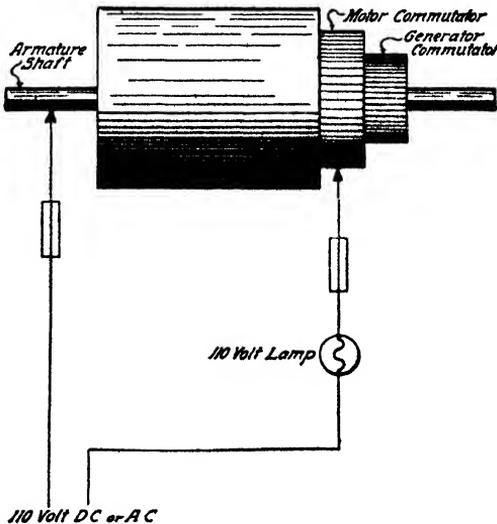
Diagram for Locating Grounded Motor Coil with Amp-Testing Set
